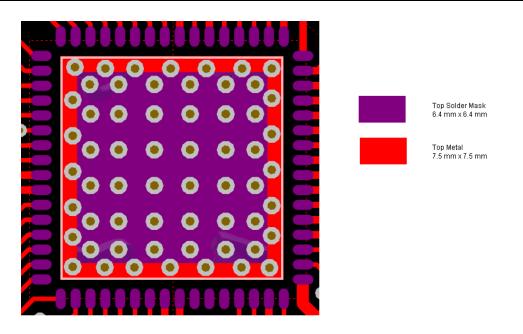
Top Metal and Solder Mask (Reduced Mask Area)
